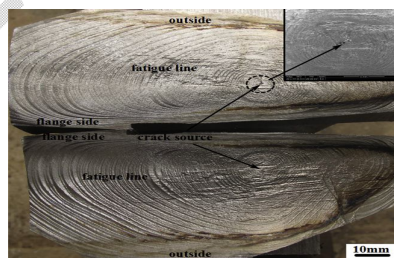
shows macroscopic morphology crack of rim of the wheel[5].
